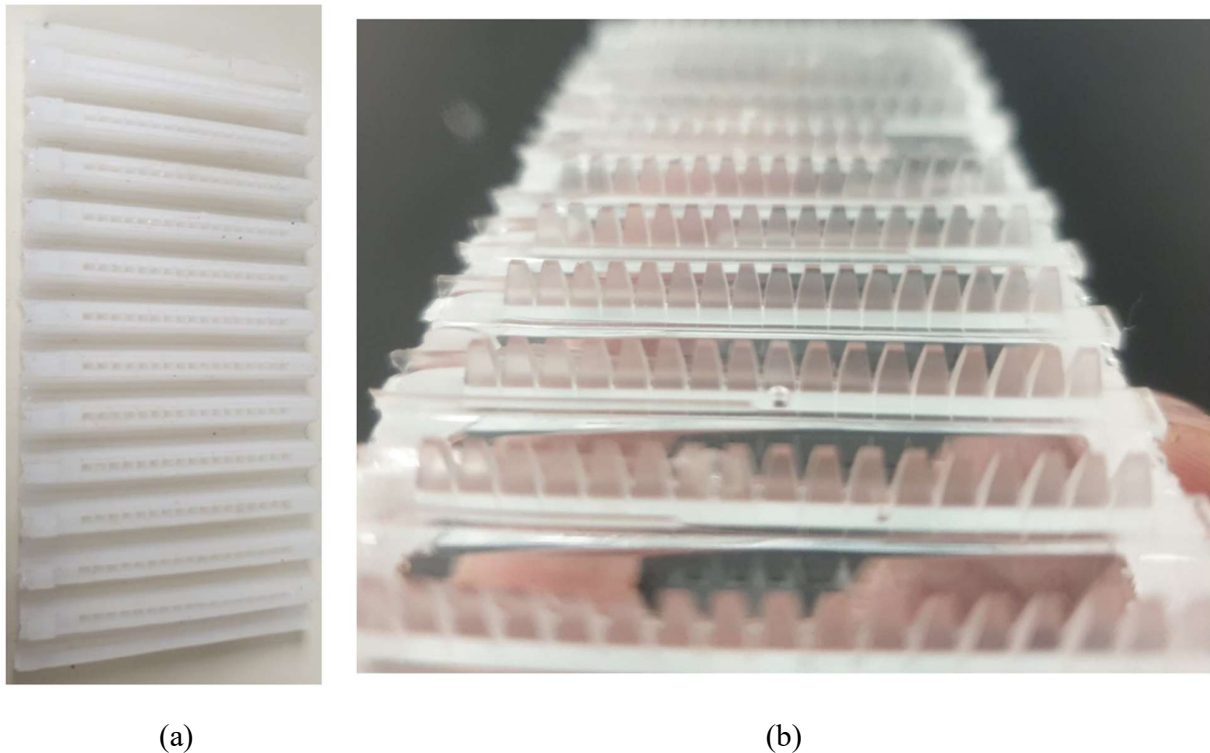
(a) *Cone Mold molded in polyethylene*, (b) *Cone array over-molded on low-iron glass in optical silicone.
